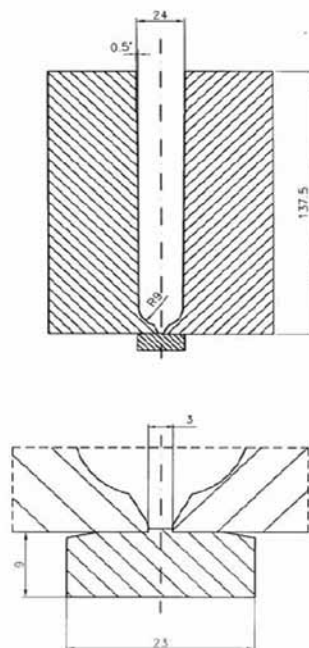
Chamfering of edges to the narrow-gap welding
